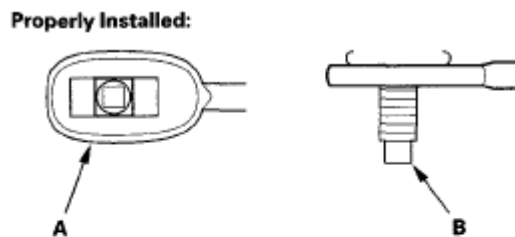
Sliding Shift Cable Socket Holder Into Bracket Base
